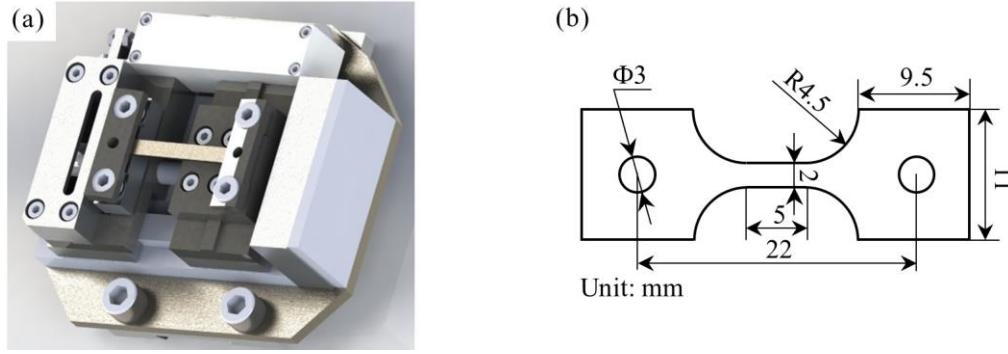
(a) Illustration of tensile machine. (b) Gauge dimensions of the tensile sample.
